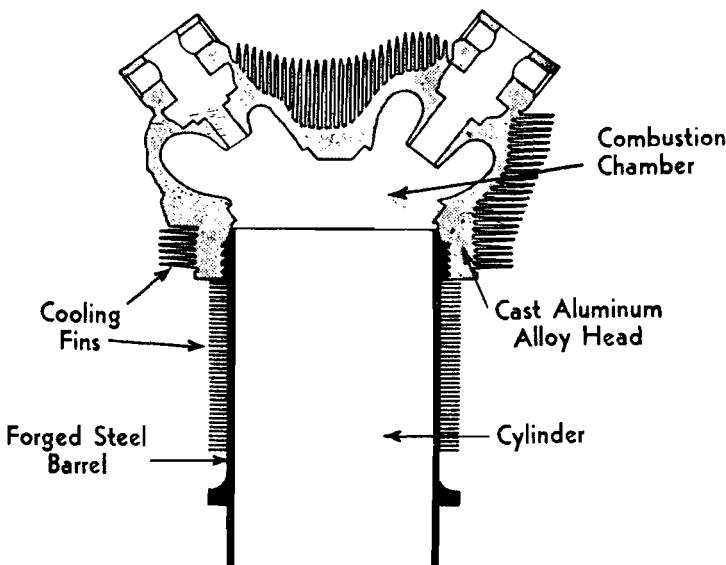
Cylinder and cylinder head of an air cooled aircraft engine.
